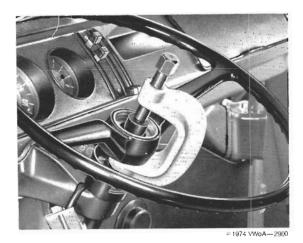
Puller being used to remove steering wheel from pre-1975 steering column.
